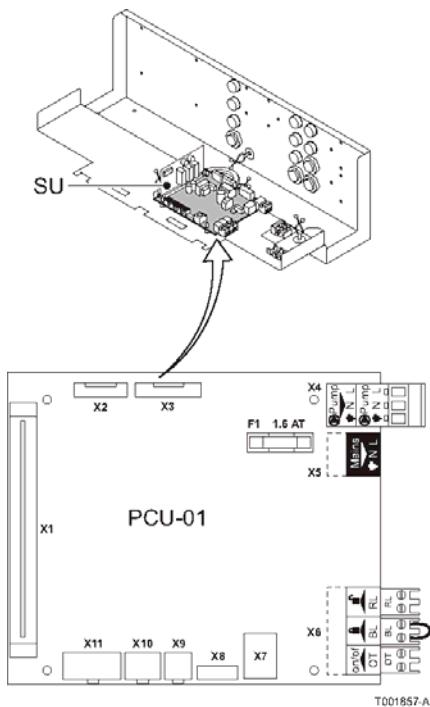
Standard control PCB (PCU-01) with safety unit (SU)
